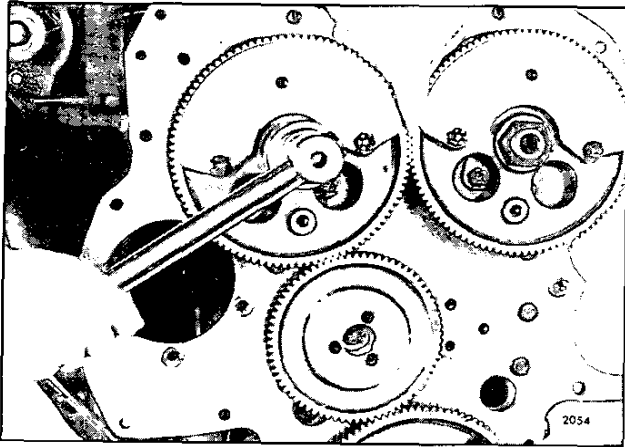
Removing or Installing Nut on Camshaft or Balance Shaft
